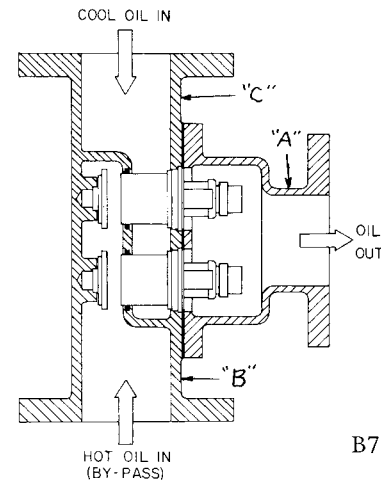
THERMAL (THERMOSTATIC) MIXING VALVE
